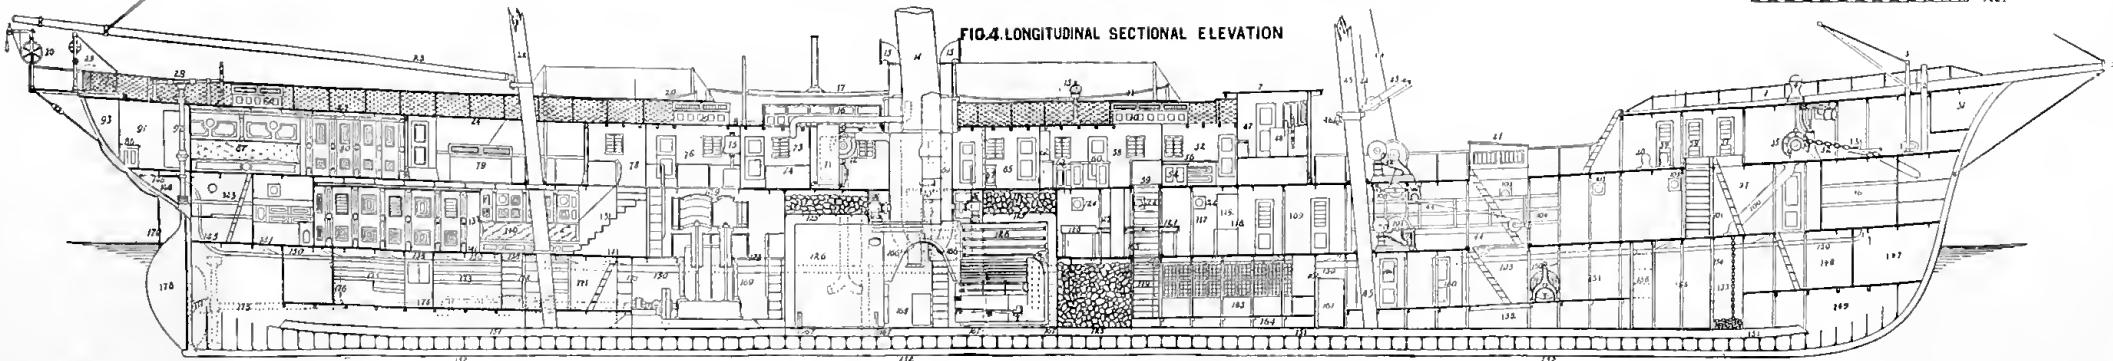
LONGITUDINAL SECTIONAL ELEVATION
